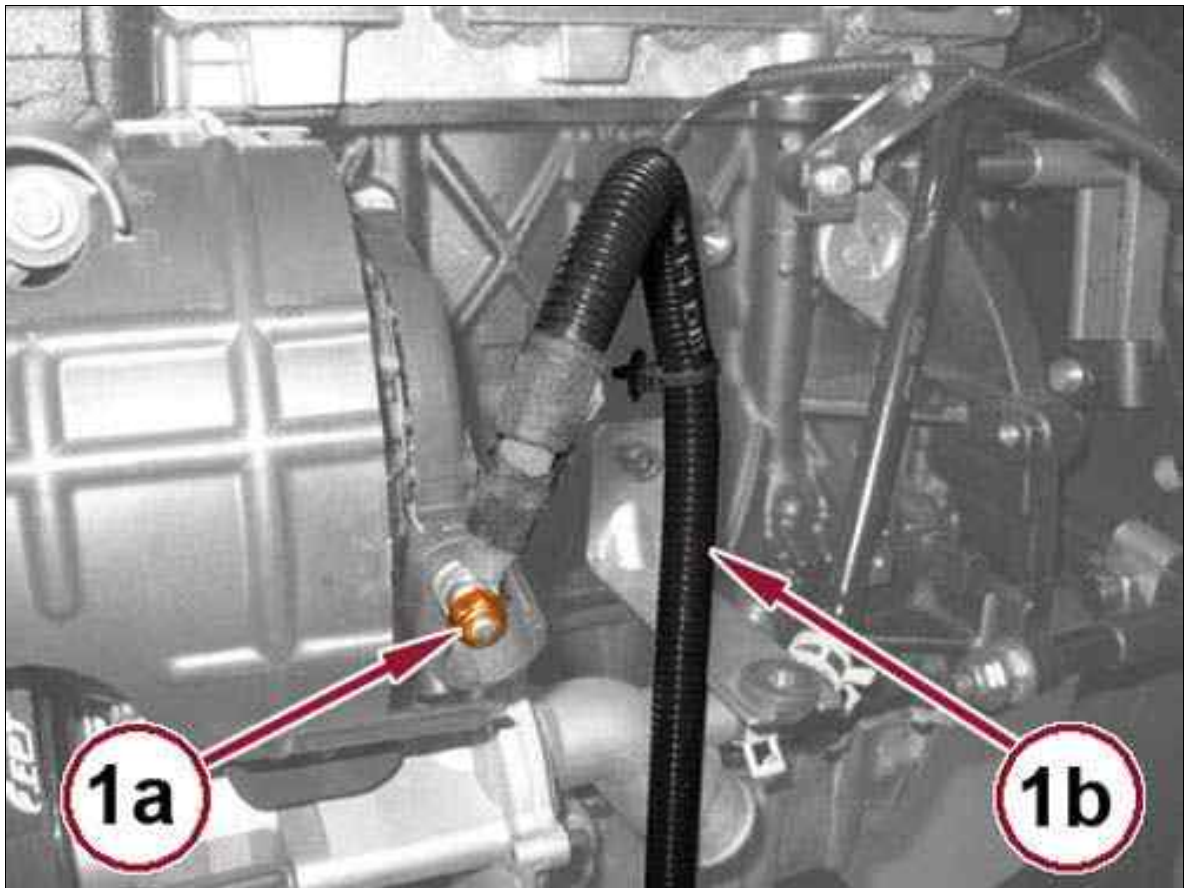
Air Intake Chamber With Throttle Body And Fuel Distribution Manifold & Bolts
